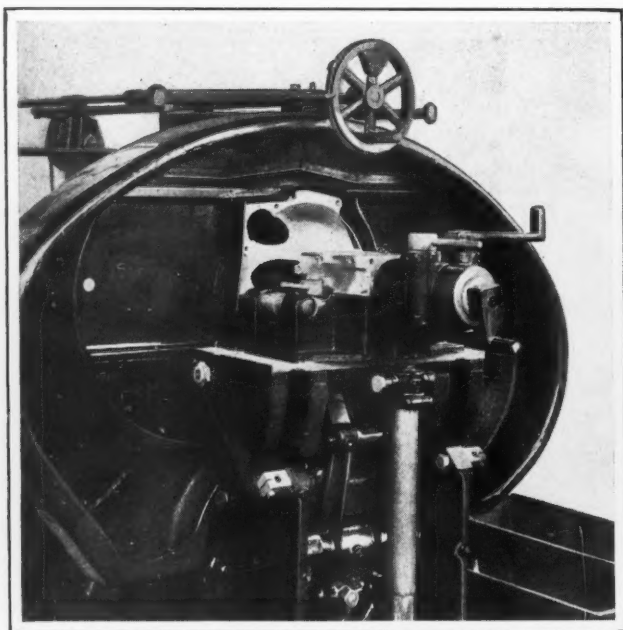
Equipment Employed in Grinding the Bell-housing Flange of an Aluminum Transmission Case
